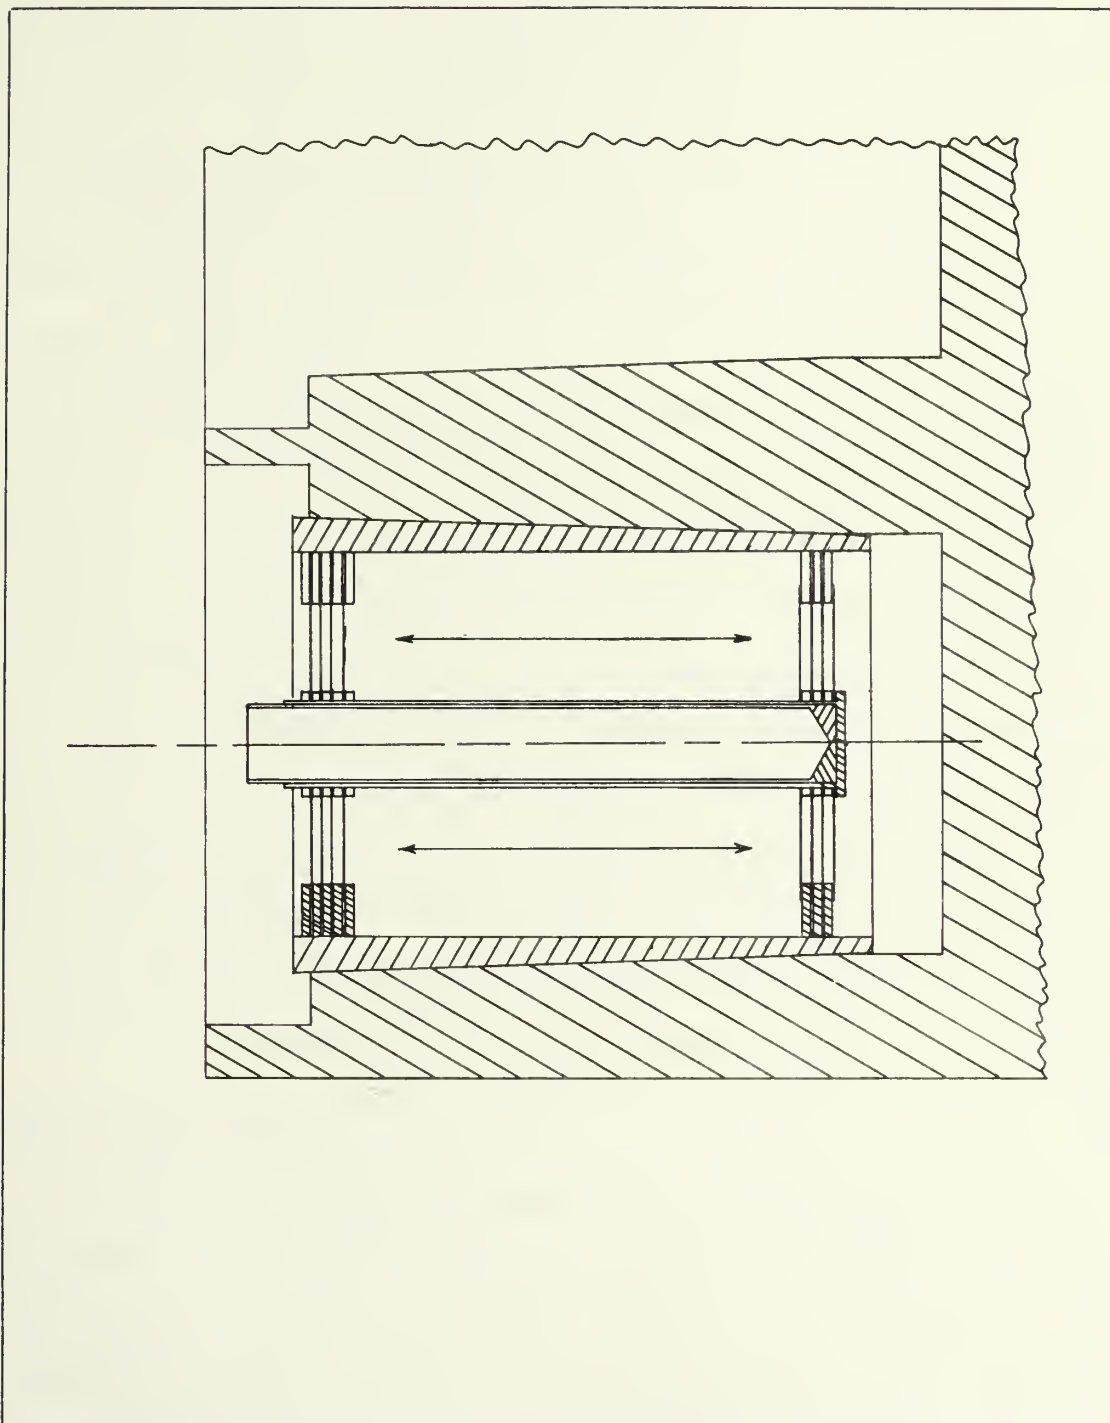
Cross-section of the reaction cell and thermopile assembly. The ring holding the assembly in place and seen in the photograph is not shown.
